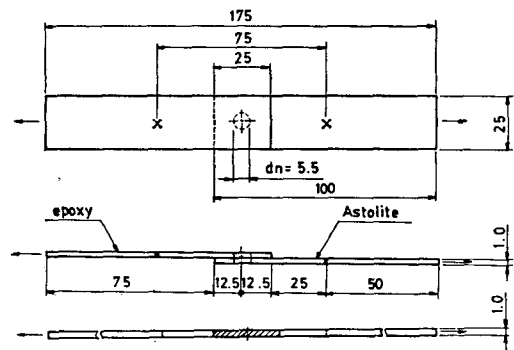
Shapes and dimensions of specimen by spot welding
